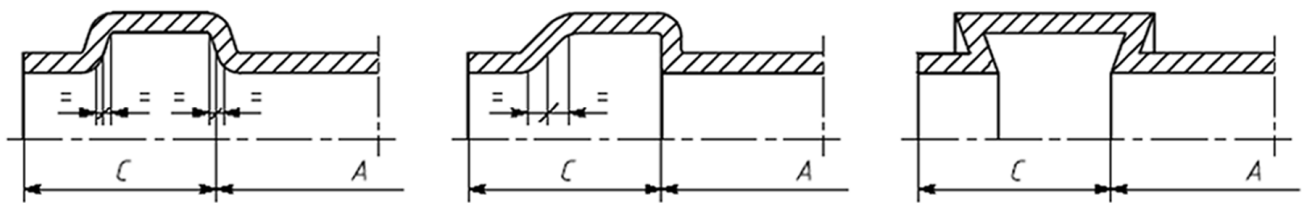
Typical groove designs for elastomeric ring seal sockets
